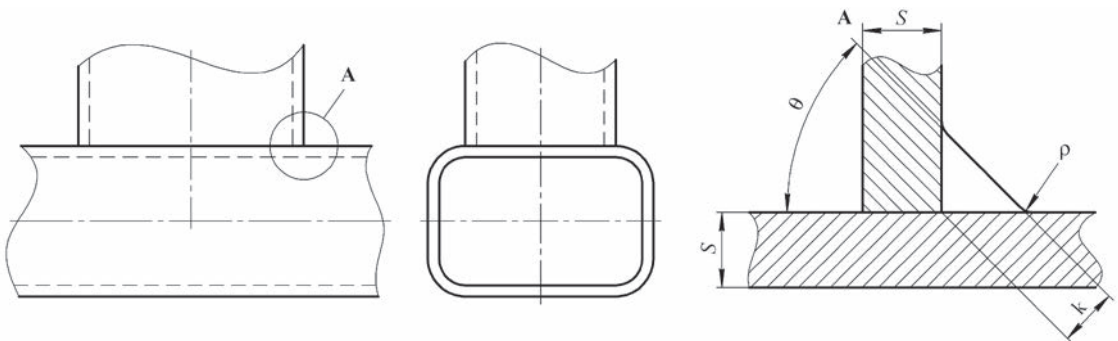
Scheme of T-welded joint of rectangular pipes
